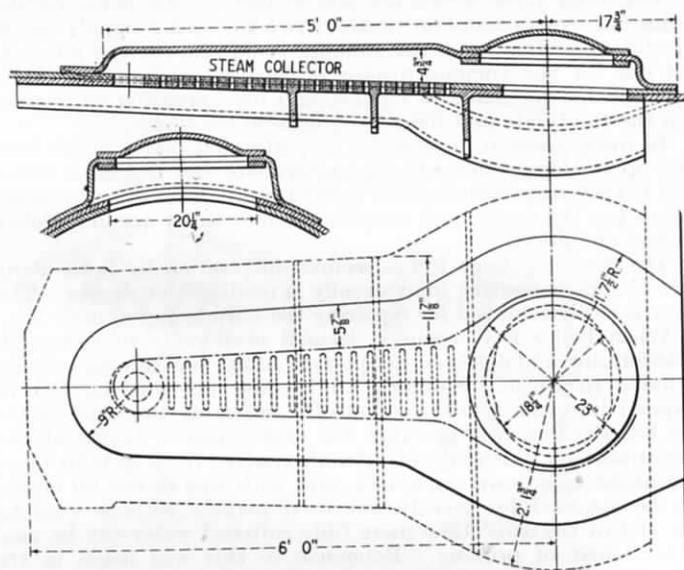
SECTIONAL ELEVATION, PLAN AND CROSS-SECTION OF STEAM-COLLECTING DEVICE, L.N.E.R.
